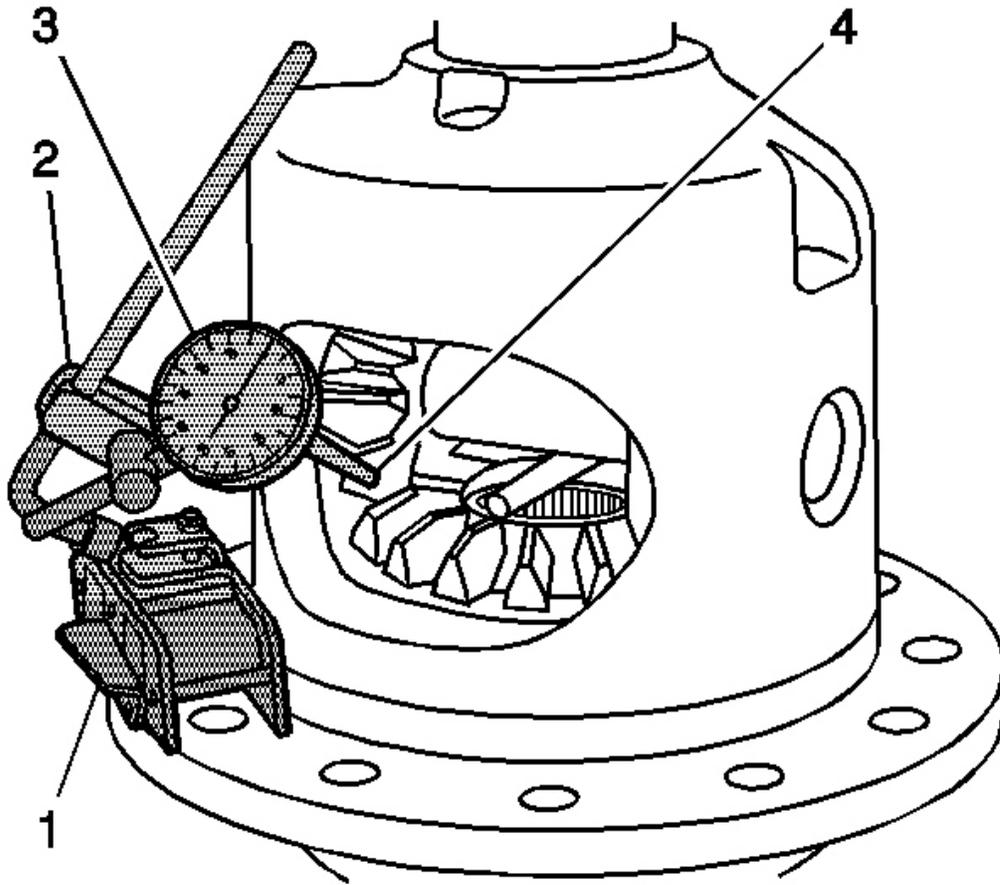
Measuring Backlash Of Pinion Gear Closest To Pinion Shaft Lock Bolt & Locking Differential Side Gear
